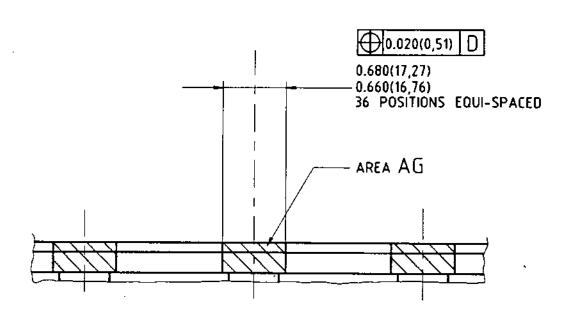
DETAIL AA SHOWING THE FINAL MACHINING DIMENSIONS FOR THE REAR LOCATION DIAMETER. FIG.406.
